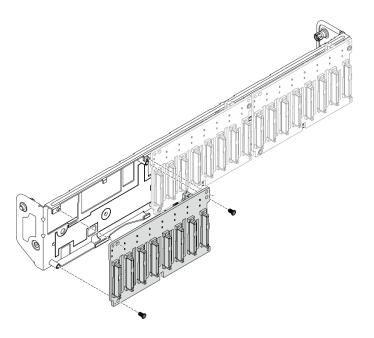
Installing backplane to carrier (E3.S bay chassis)
